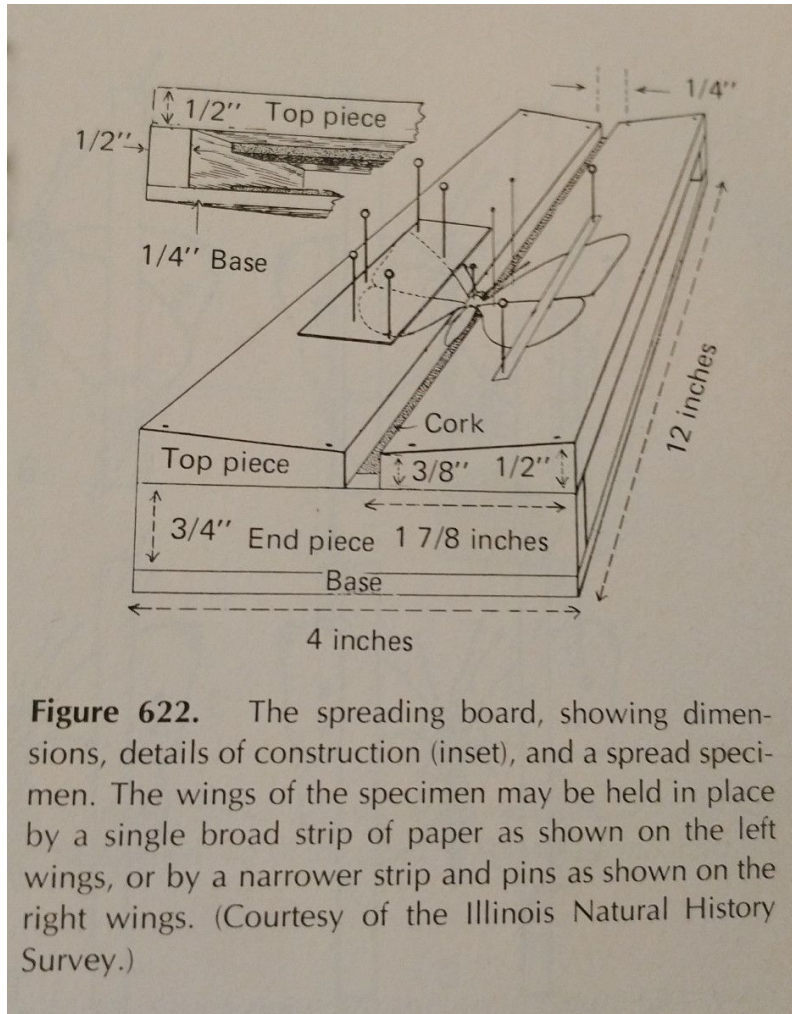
The spreading board, showing dimensions, details of construction (inset), and a spread specimen. The wings of the specimen may be held in place by a single broad strip of paper as shown on the left wings, or by a narrower strip and pins as shown on the right wings. (Courtesy of the Illinois Natural History Survey.)
